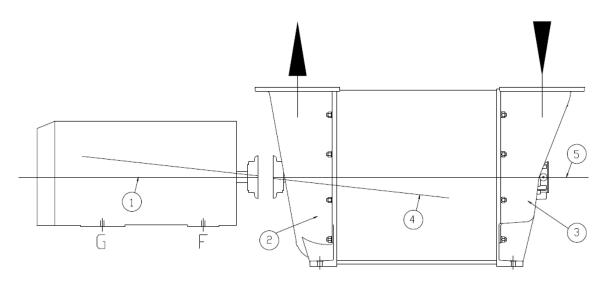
Calculation of the adjustment with the motor on the outlet end
